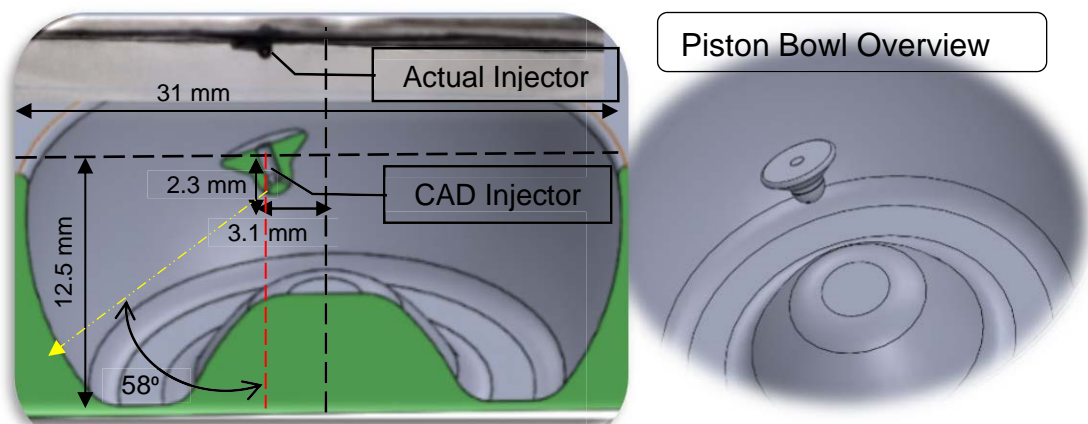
Injector Placement: Robin DY23-2D vs. CAD Design
